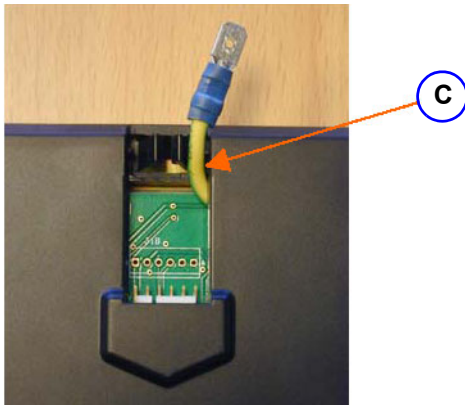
Install A/N keyboard into the A/N Keyboard Bottom Enclosure
